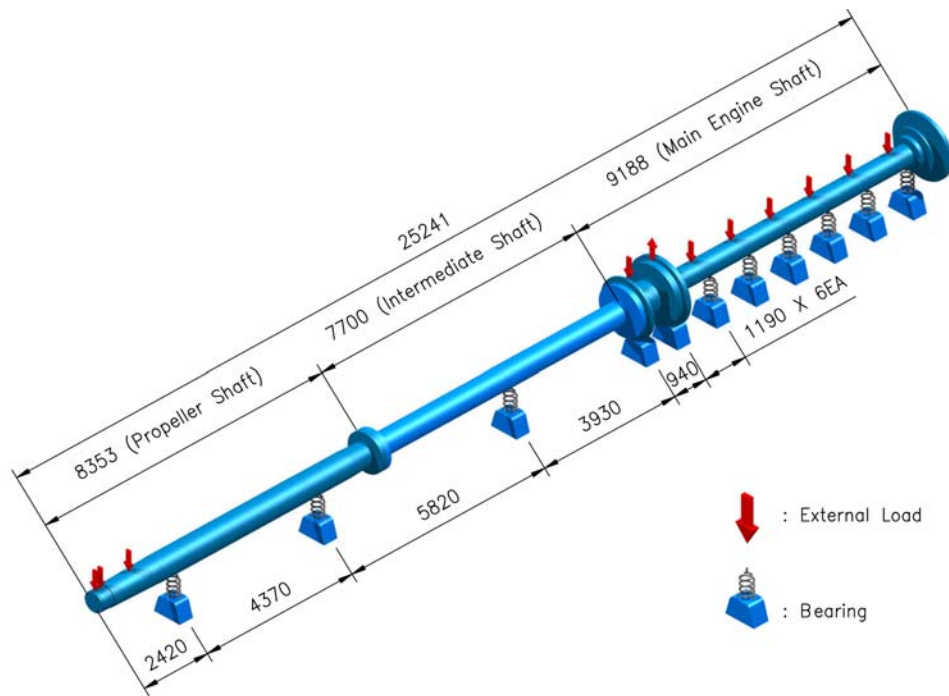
Modeling of shafting system for shafting alignment calculation(b)
